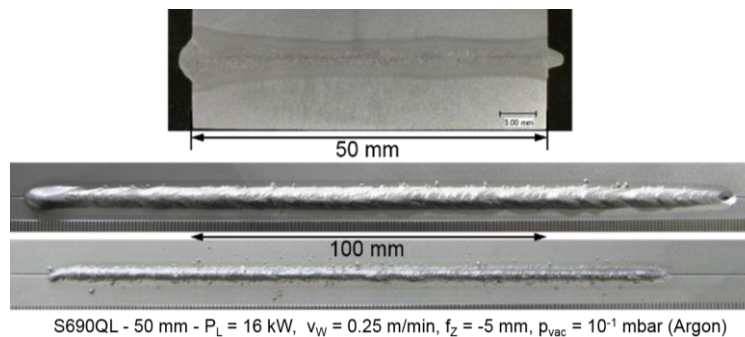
Connection weld S690QL, 50 mm, single-sided, single-pass technique
